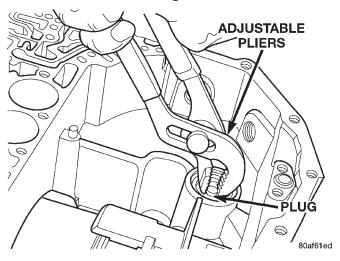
Remove Low/Reverse Accumulator Plug (Cover)
